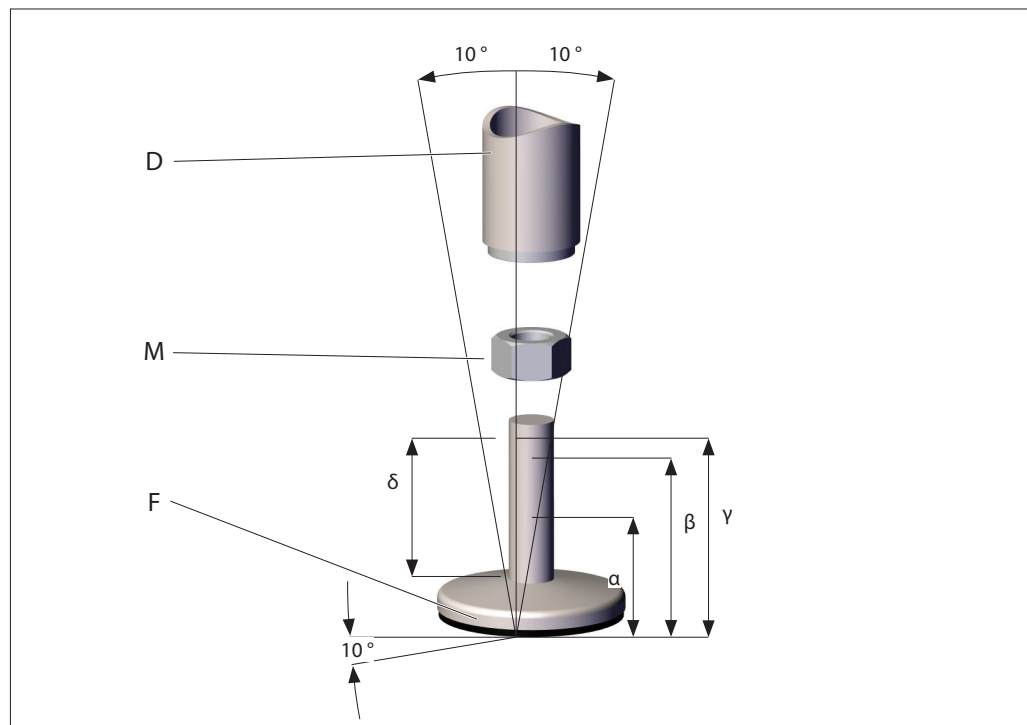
Standard articulated foot – Dimensions see Tab. 7 – D: Spacer tube; F: Articulated foot; M: Nut; S: Disc; α , β , γ , δ : see Tab. 7
